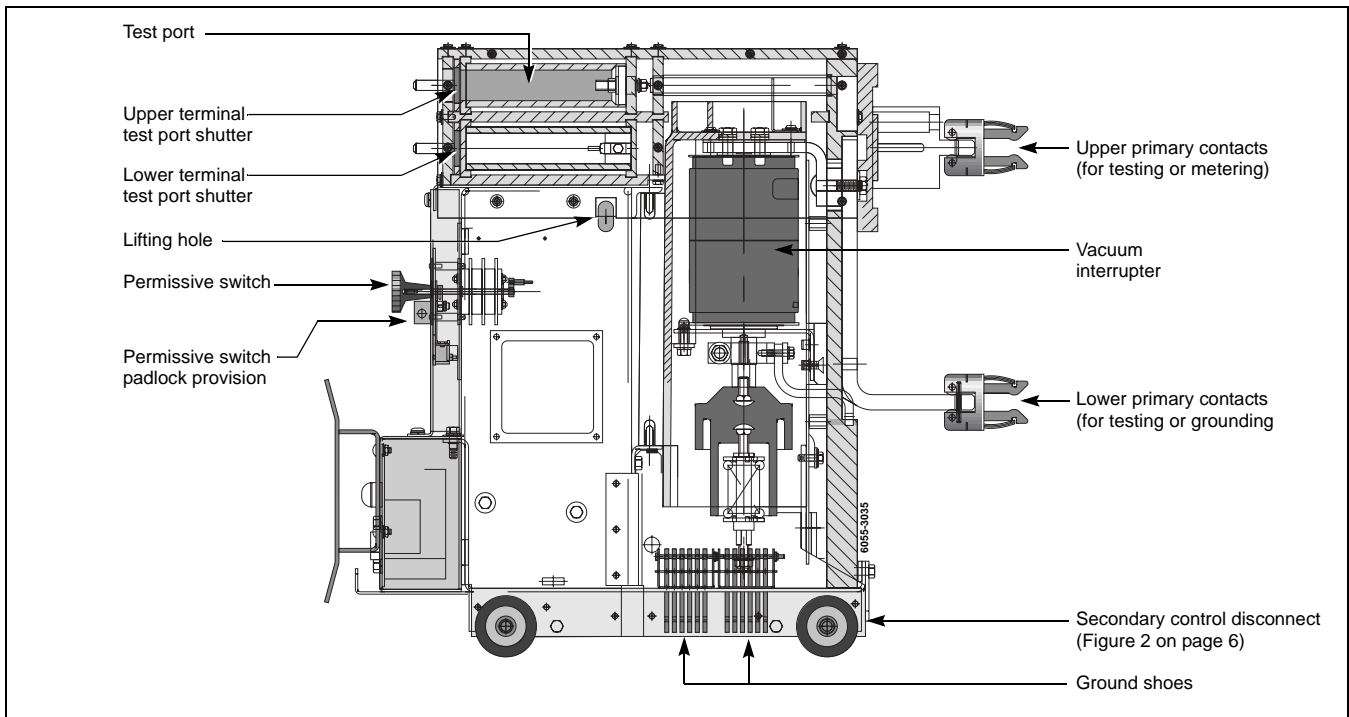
6-Port Ground and Test Unit—Sectional View (Operating Mechanism not shown)
